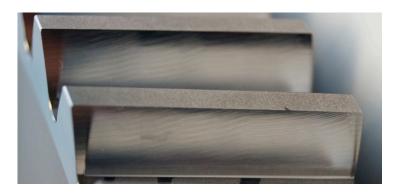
Quality of the hard machined test gear (with inserts of type 1010), lateral view on the gear flank.
